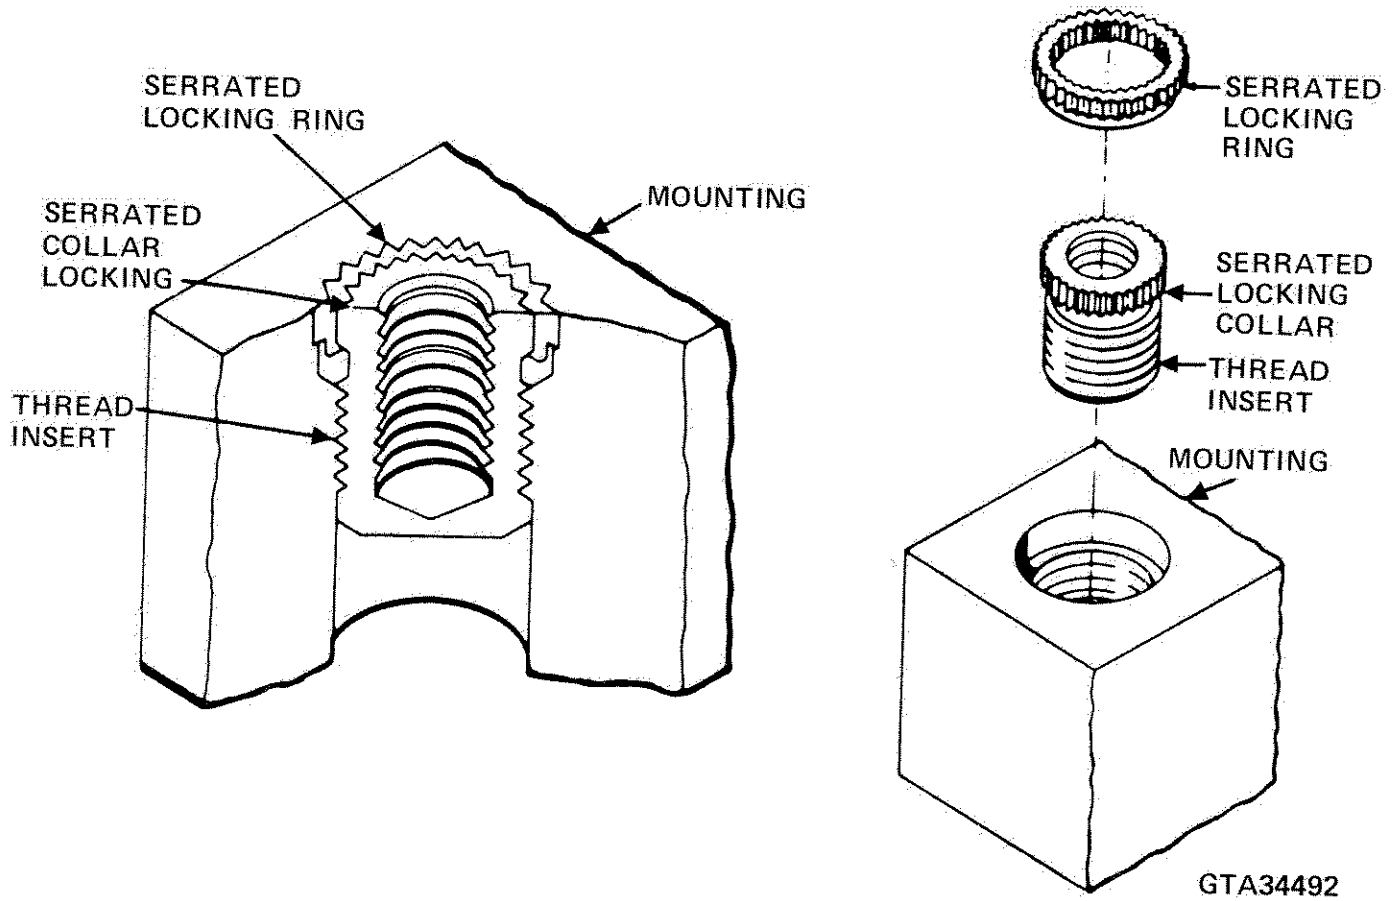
Locking (Rosan) Screw Thread Insert.
